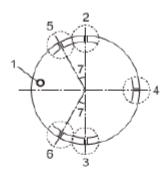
Identifying Piston Rings Position Courtesy of SUZUKI OF AMERICA CORP.
